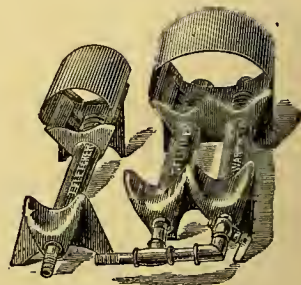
OTHER FORMS OF SOLDERING-IRON HEATERS (FLETCHER).
